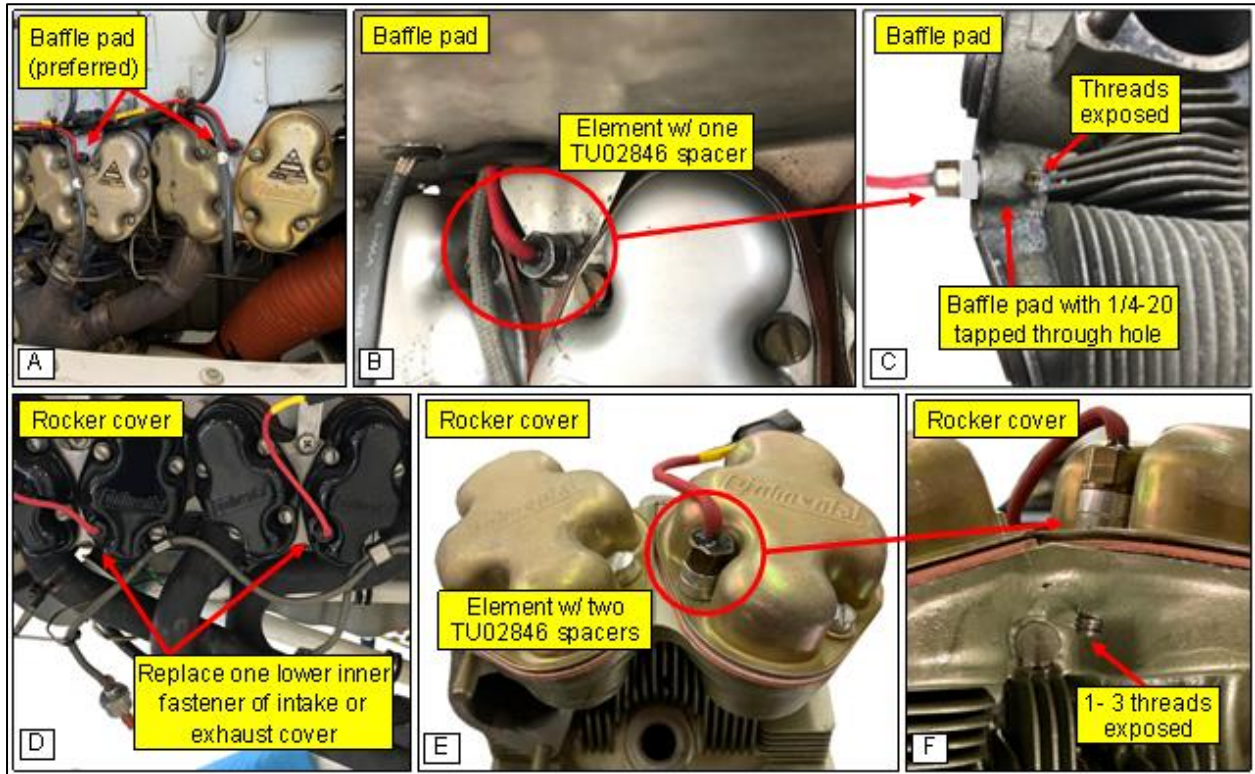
Continental smallbore crossflow cylinder head w/ split rocker covers: 240 and 360.
